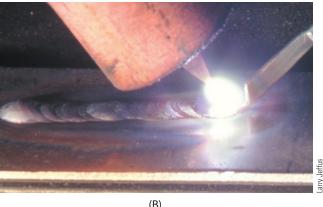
Note the difference in the weld produced when different sizes of filler rods are used.
